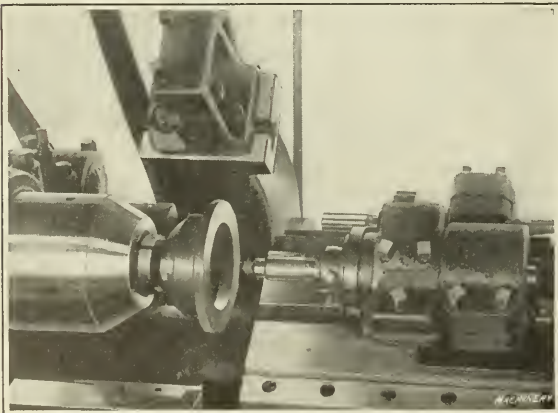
Standard Holder carrying Reamer and Counterboring Tool
